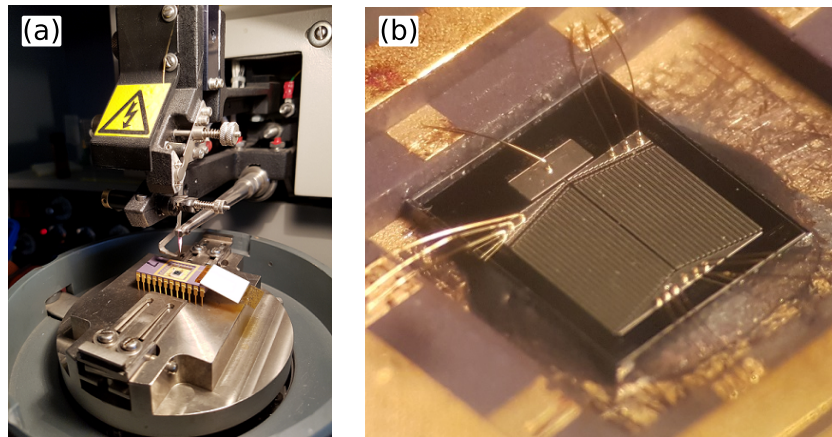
Sample packaging and wire bonding. a) Wire bonding connections to an array of HEMTs which have been mounted into a 24 pin DIL package. b) A single GaN-on-Si power HEMT (3 mm side) mounted in an eight pin DIL package showing multiple bond wires placed to the source and drain contacts, and a single bond wire to the gate contact.
